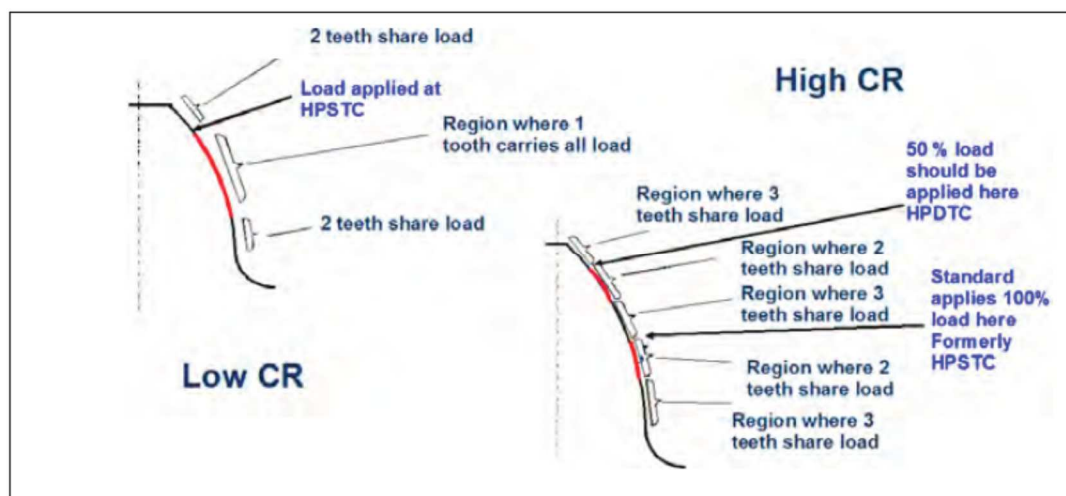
Regions of Single-Tooth, Double-Tooth and Triple-Tooth Loading on Low Contact Ratio and High Contact Ratio Gears [18].
